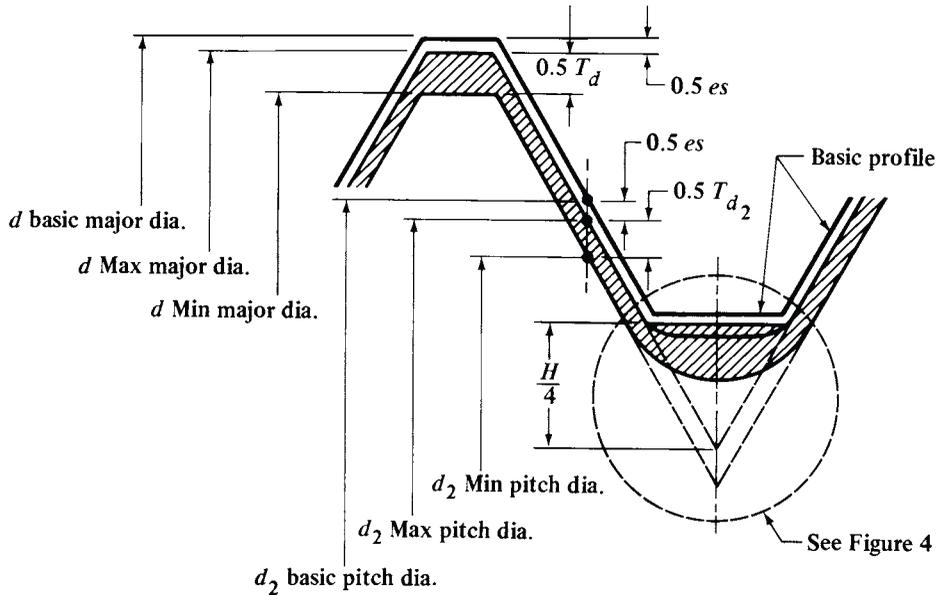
External Thread — Limiting M Profile. Tolerance Position g
